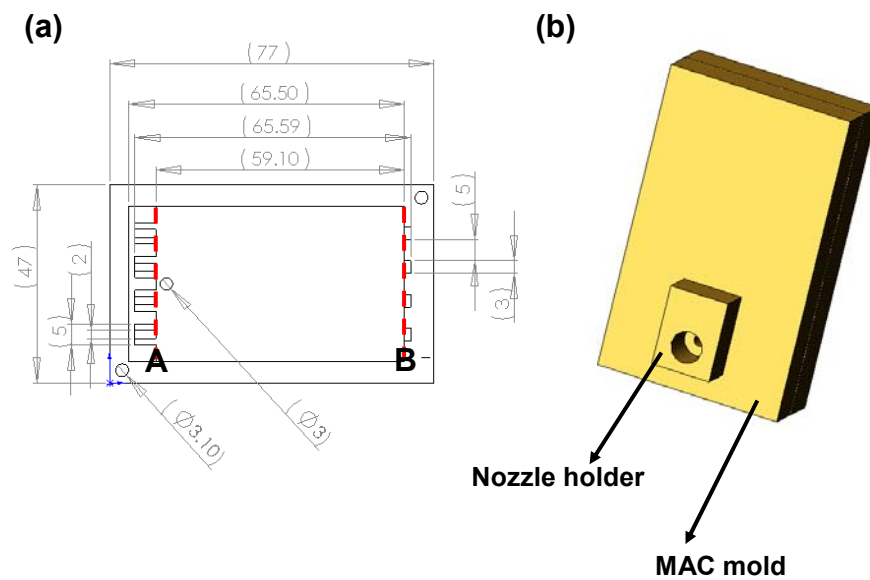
(a) Dimensions and (b) back part of the half HG-MAC mold.
